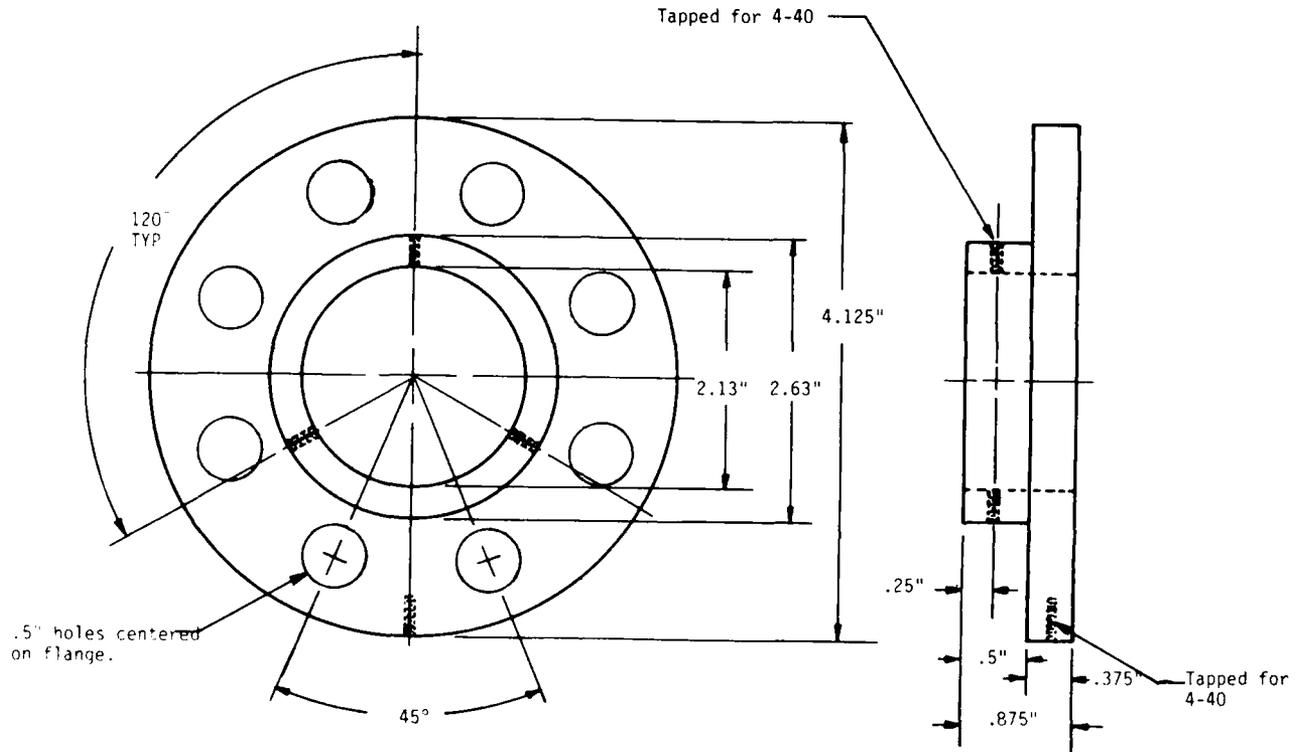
Collimator collar mount; unless otherwise specified, tolerances are  $\pm .002$
